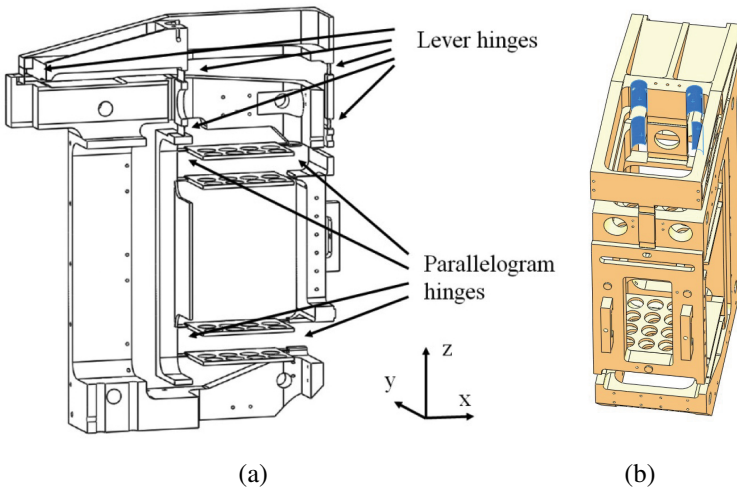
(a) Cutaway view of the 13-hinge stage, (b) The two circular notches milled from the top to ‘liberate’ the central connecting rod are shown in blue.
